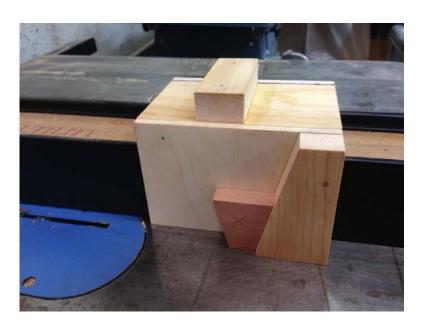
I made a table saw fence fixture for holding the segments upright and securely while running through the table saw blade. A larger and more stable segment might not need a fixture, but this one did. A holding clamp for the segment is shown later. The fence is angles 15 degrees for a 12-segment ring. Fences for other angles could certainly be installed. The fence should be attached to the fixture with several screws because the clamp (when installed) will put some pressure on it. All segments were cut with the X facing outward to make sure the segment slots lined up correctly at assembly time.
